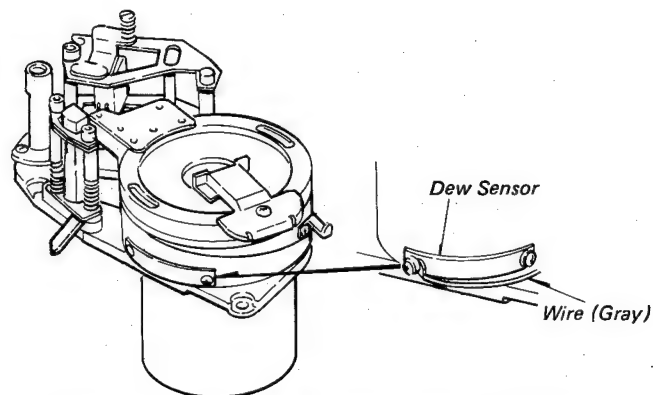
Cylinder Assembly Shown in Relation with Dew Sensor
